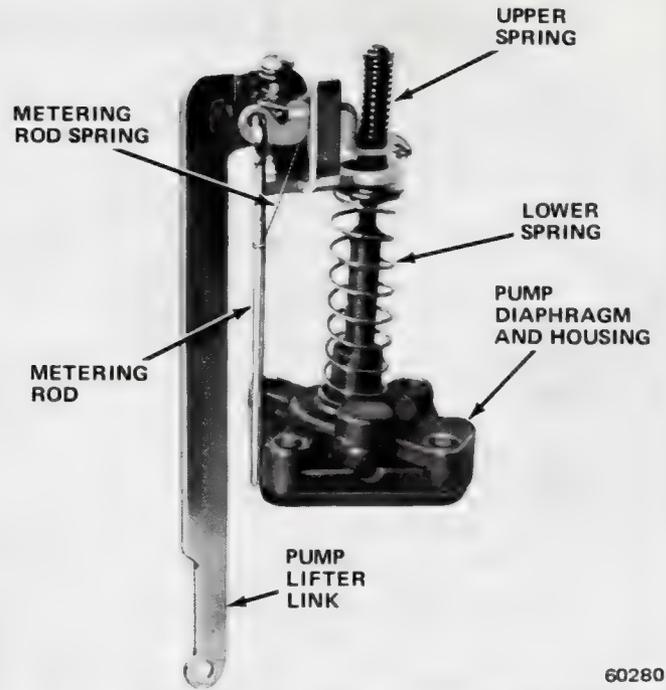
J-47 Accelerator Pump and Metering Rod Assembly
